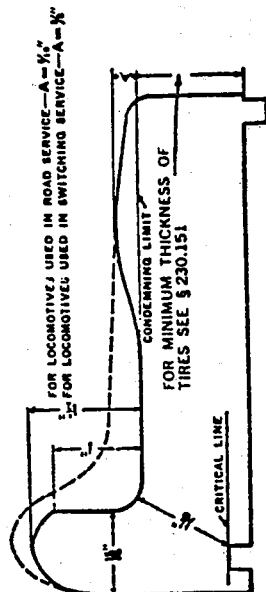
Steel tire. Shrinkage fastening with shoulder and retaining segments. Driving and tralling wheels.
